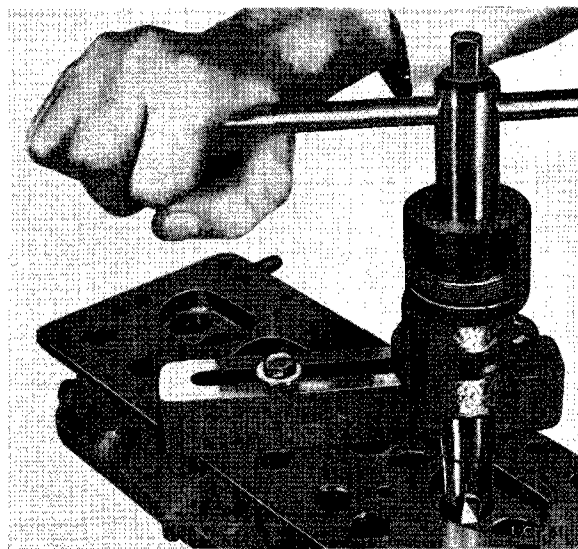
Boring cylinder head for valve seat insert using tool No. MFS6056-1
